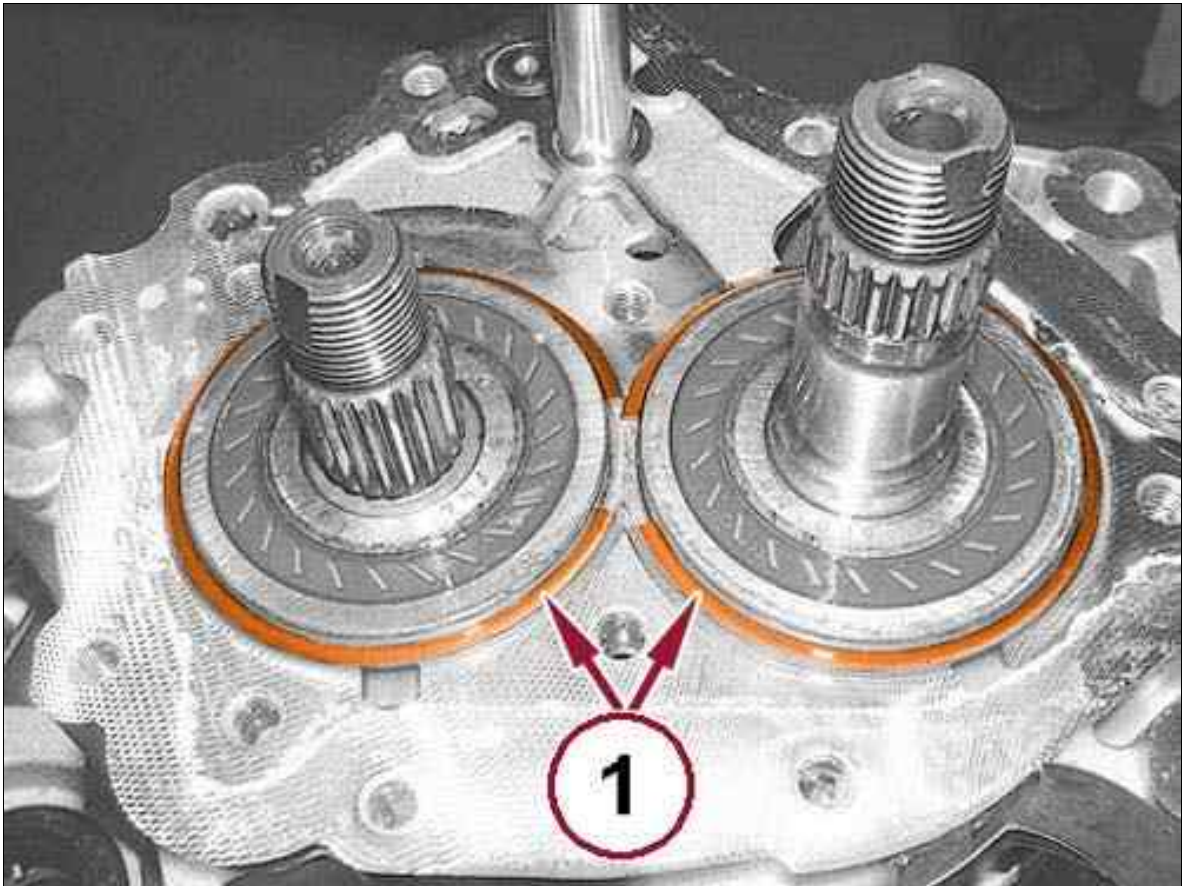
Input And Output Shaft Rear Bearing Retaining Plate & Bolts
